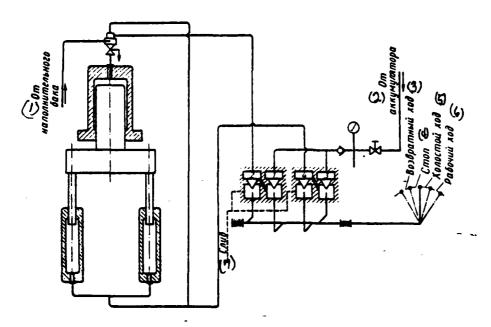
The schematic hydraulic diagram of single-cylinder press with the pump-and-battery drive - attachment/connection of the auxiliary cylinder of filler valve to the line of the pull-backs: 1 - pressure valve of working cylinder; 2 - the drain valve of working cylinder; 3 - the pressure valve of pull-backs; 4 - the drain valve of pull-backs.
